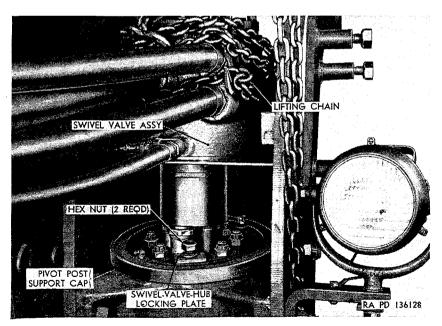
Front view of upper end of pivot post with swivel valve in raised position.
